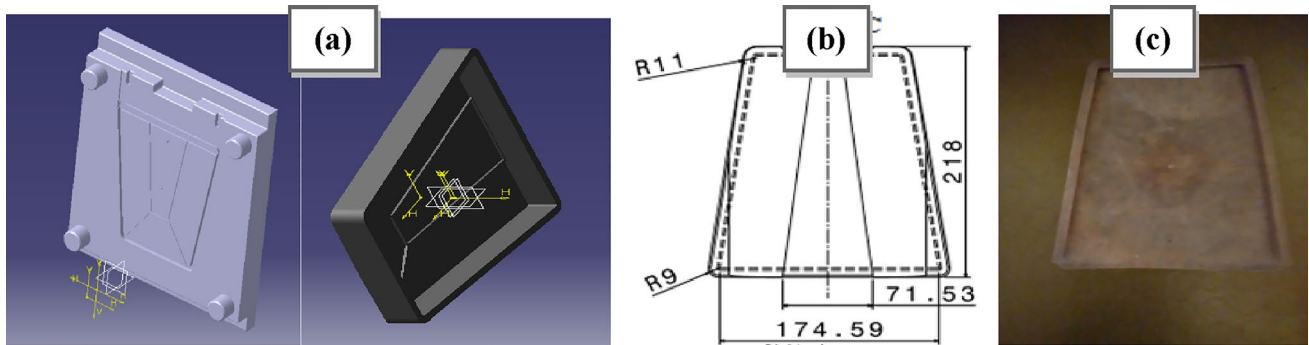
The mold used for fabrication of the composite: a box closure specimen mold cores and 3D view. b Mold size for box closure specimen, c composite product
